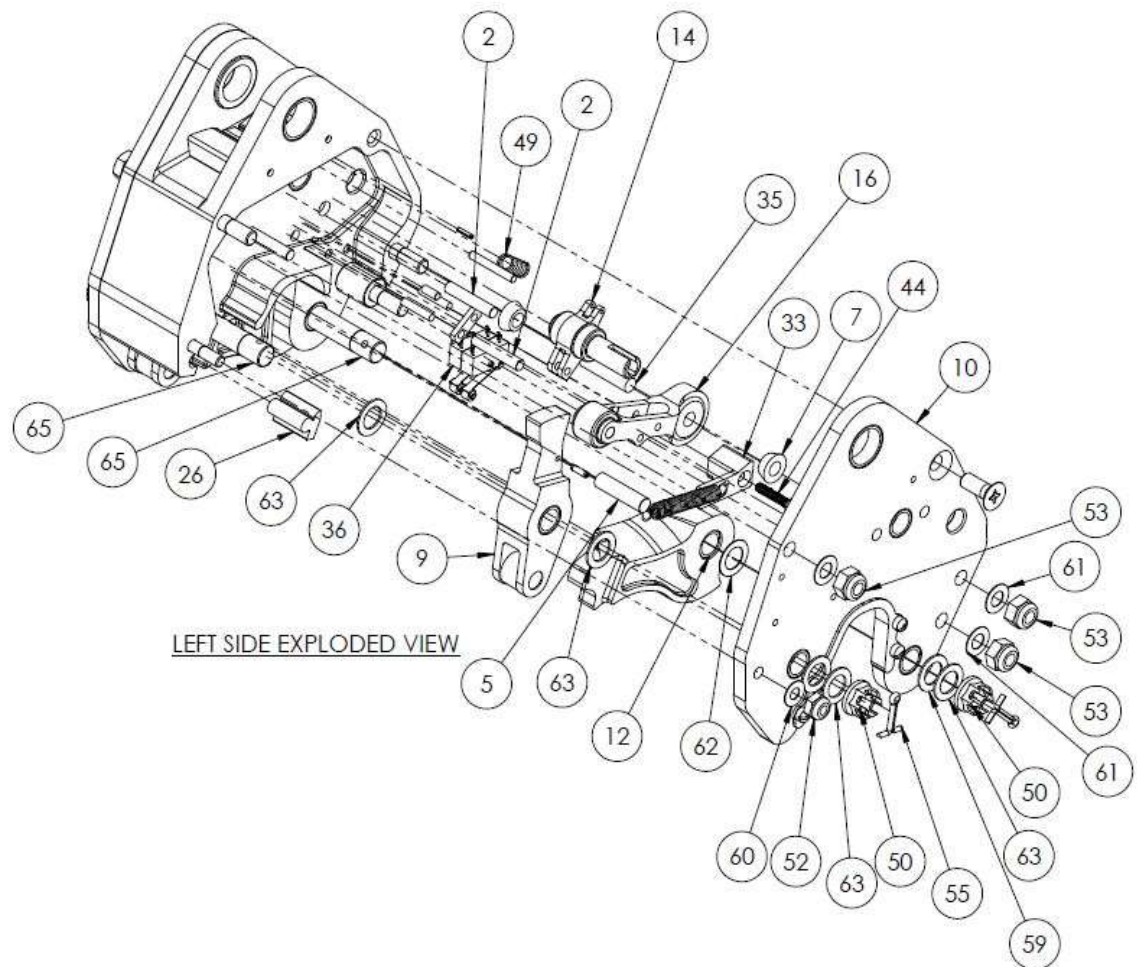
Model 350 ADEC™ Left Side Exploded View (Internals)
